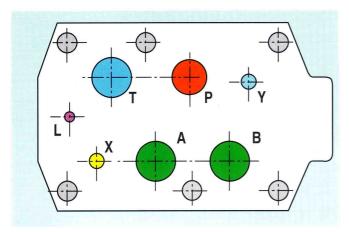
Mounting pattern, form A25 DIN 24 340 Mounting pattern size 25 preferrably used for pilot operated directional valves of this size
